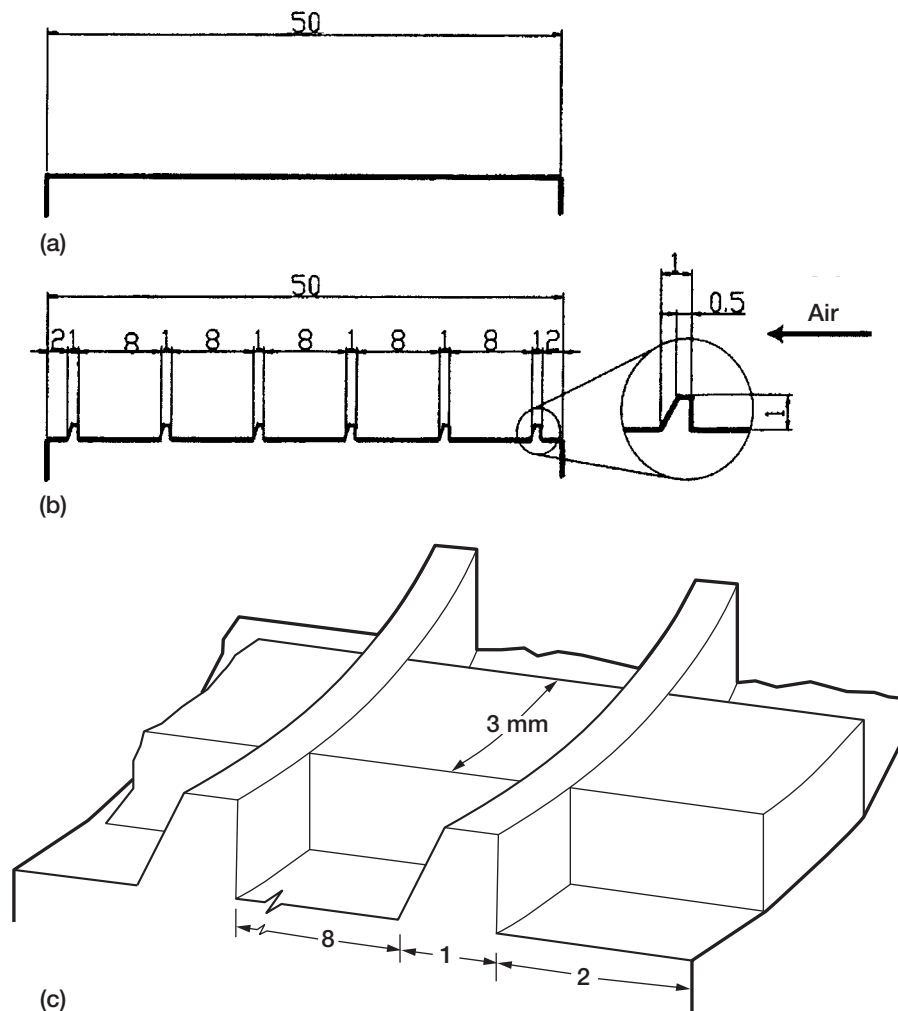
Configuration of test seal. (a) Annular seal. (b) Labyrinth seal. (c) Flow blockers. Dimensions in millimeters. (Kanki et al., 2003.) Courtesy ISCORMA-2.
